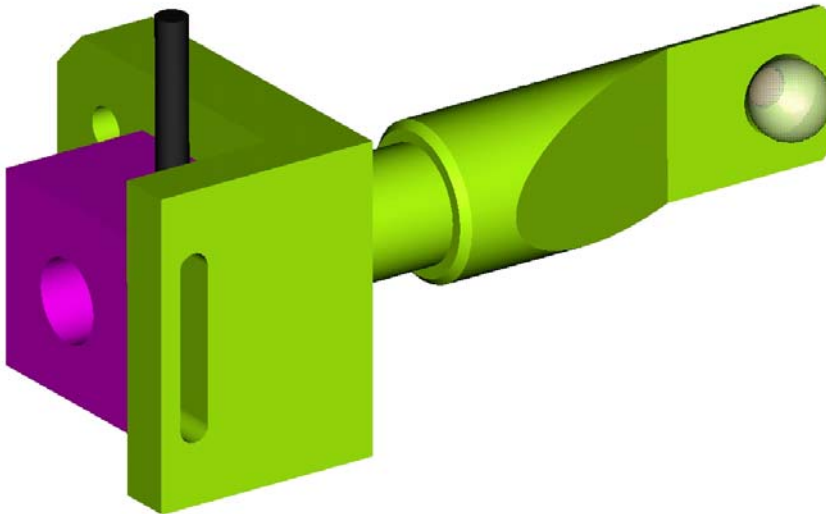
Bracket design for use when tracker is located to the side of the adapter
